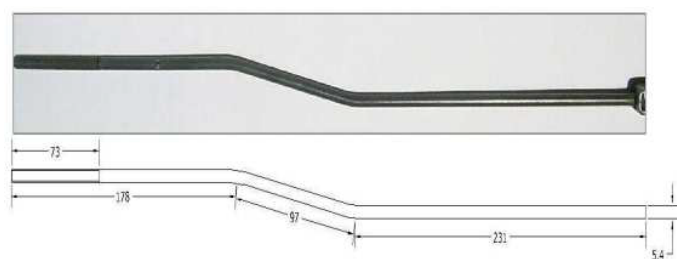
Digital photograph and 2D CAD Drawing of Brake Rod.
